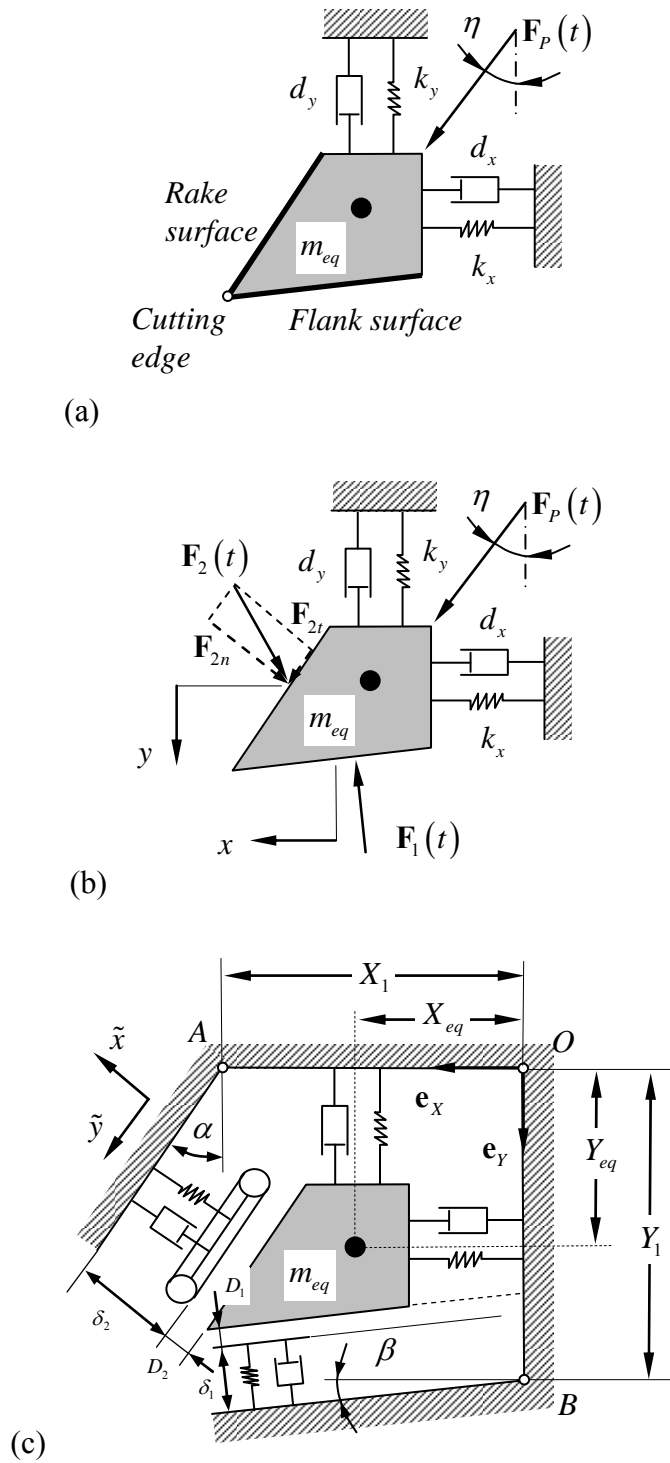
Cutting tool mechanical model: (a) surface description, (b) external forces, (c) geometry and equilibrium.
